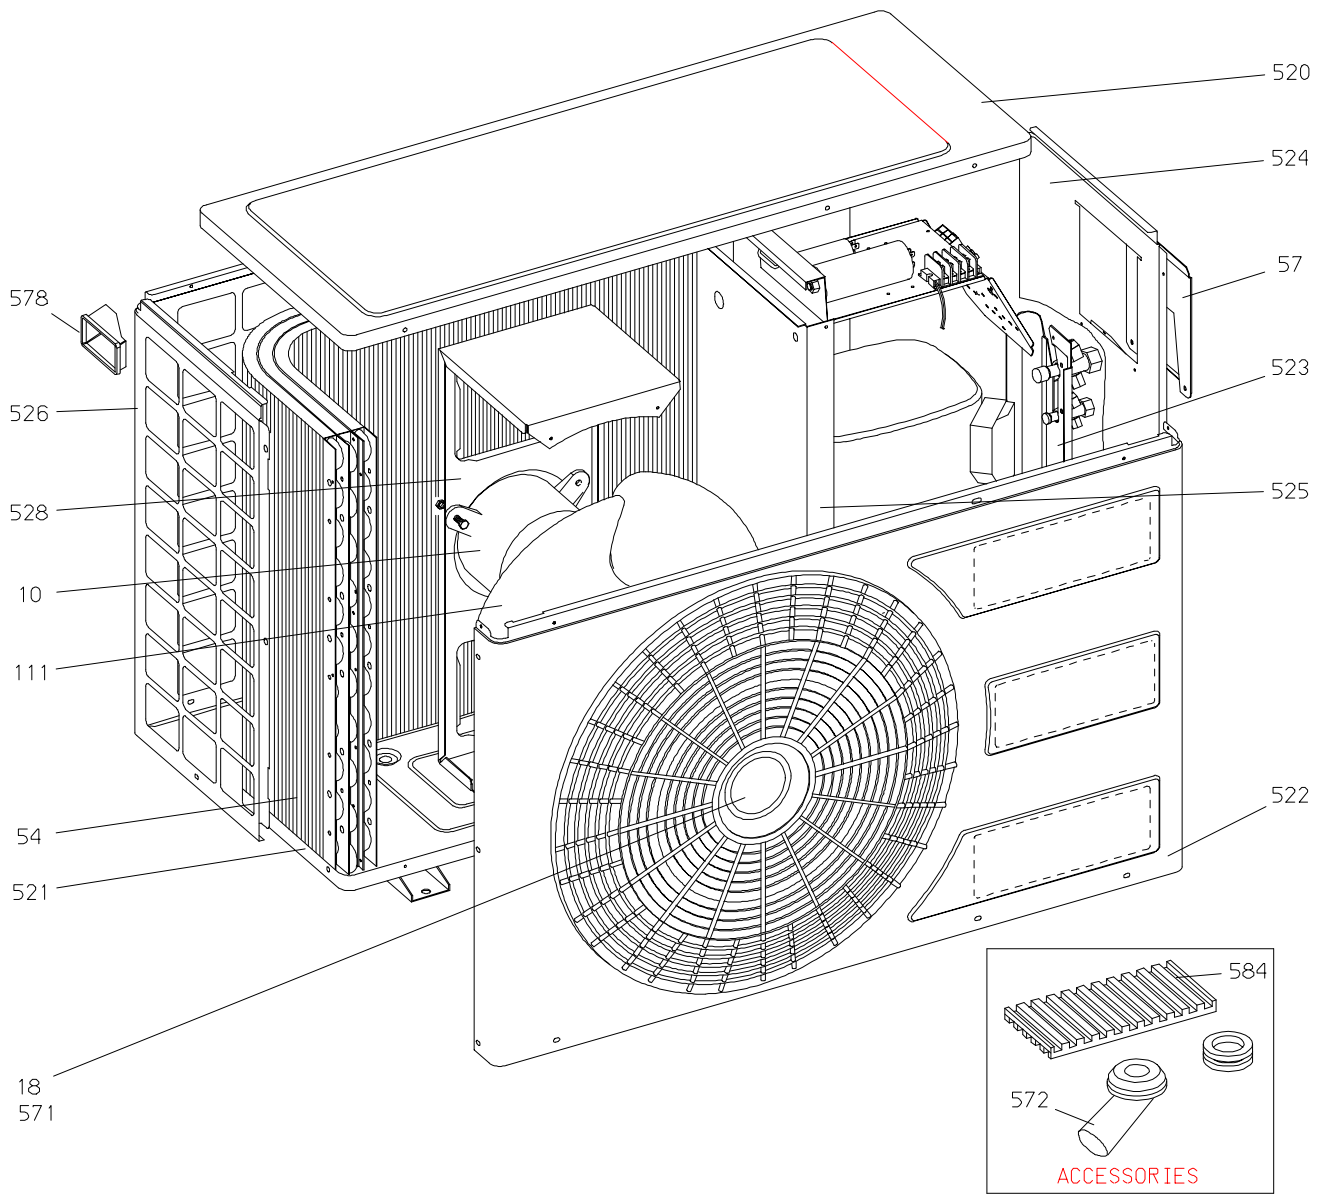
GENERAL ASSEMBLY - CUE-45,50,55,60,80
